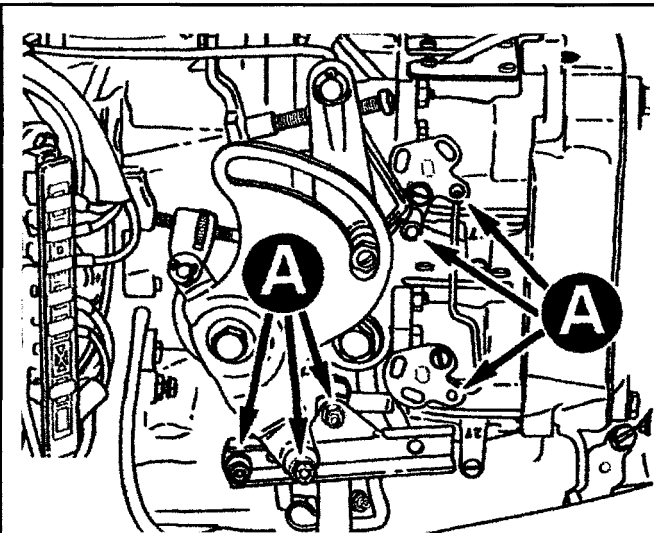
Carburetor, throttle and shift linkage lubrication points-65 Jet-115 Hp (1632cc) V4 motors
